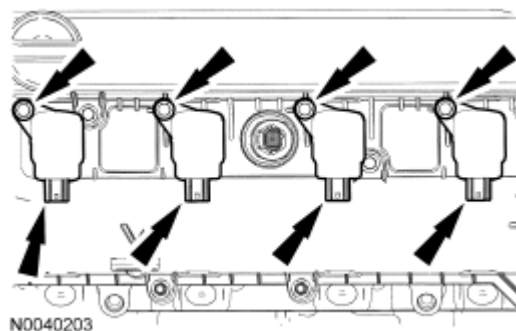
Locating Coil-On-Plug Assemblies And Bolts
